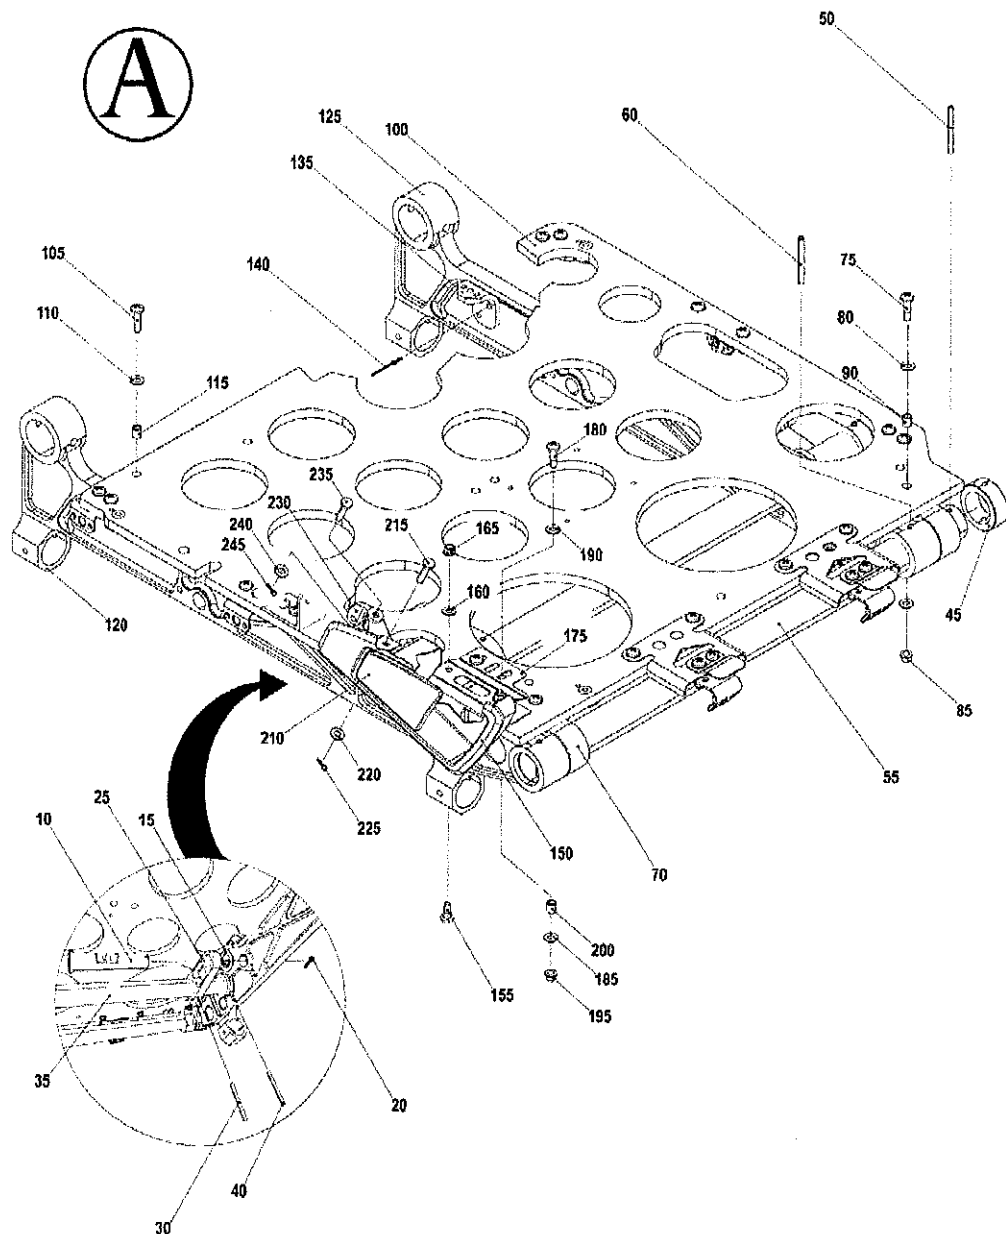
SHEET 2 SEAT PAN STRUCTURE ASSEMBLY
